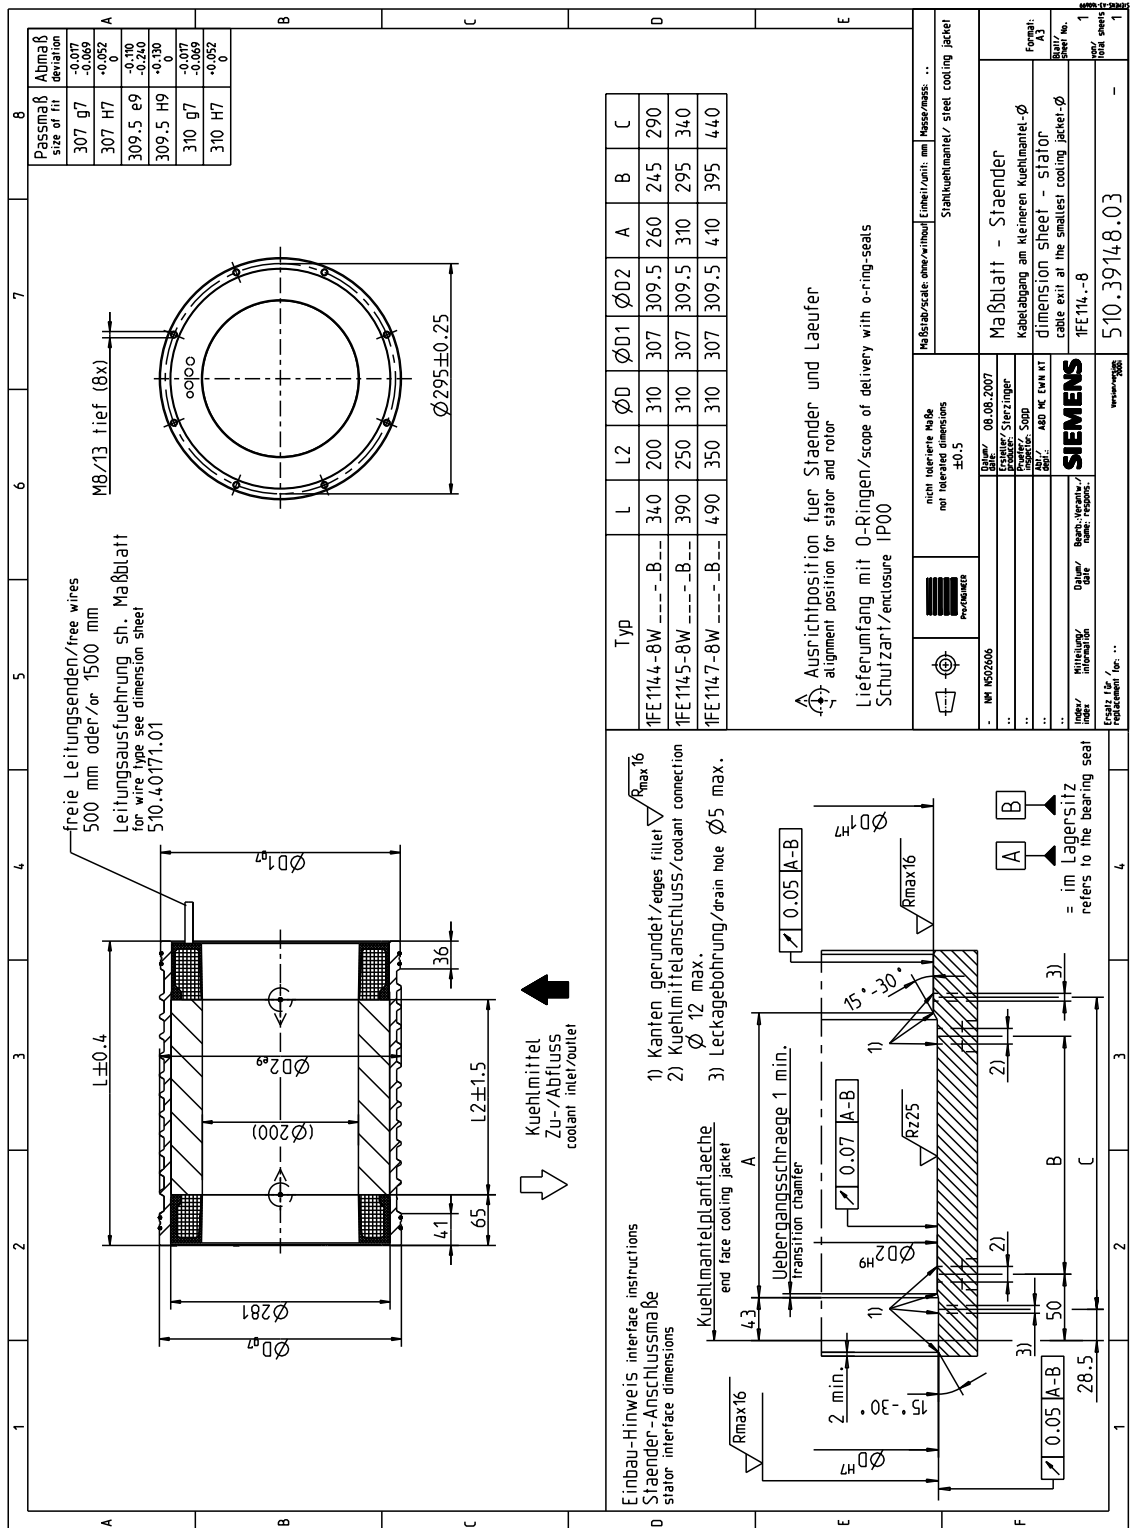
1FE114-8, stator with cooling jacket, cable outlet at the smaller cooling jacket diameter
